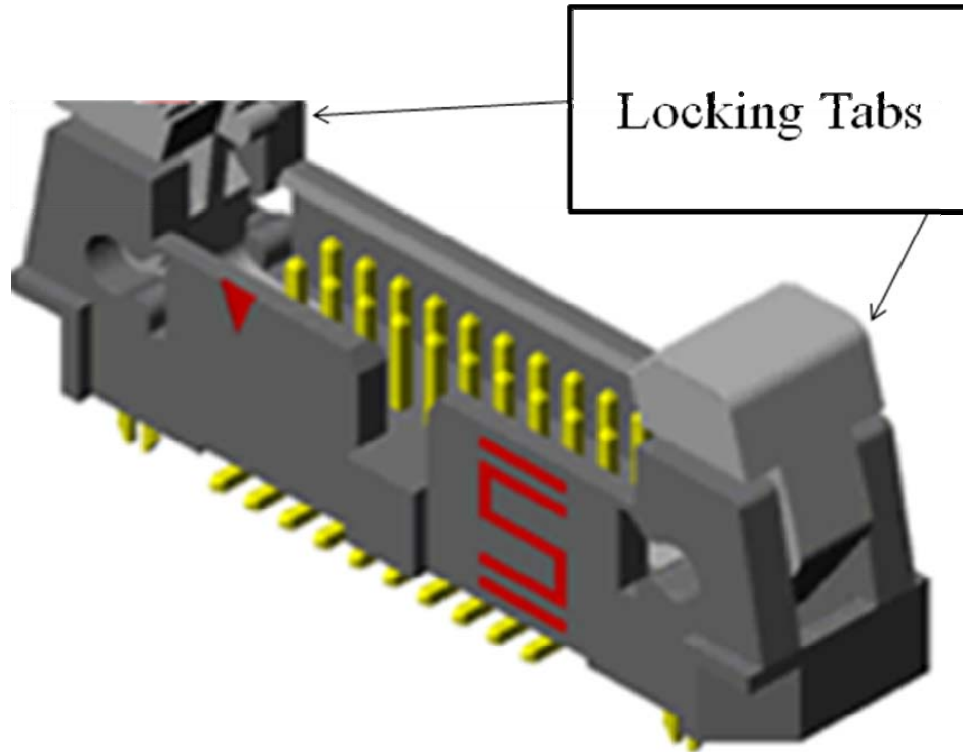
Locking Mechanism used on I-board to connect and secure C2B data cable to PCB (From [20])
